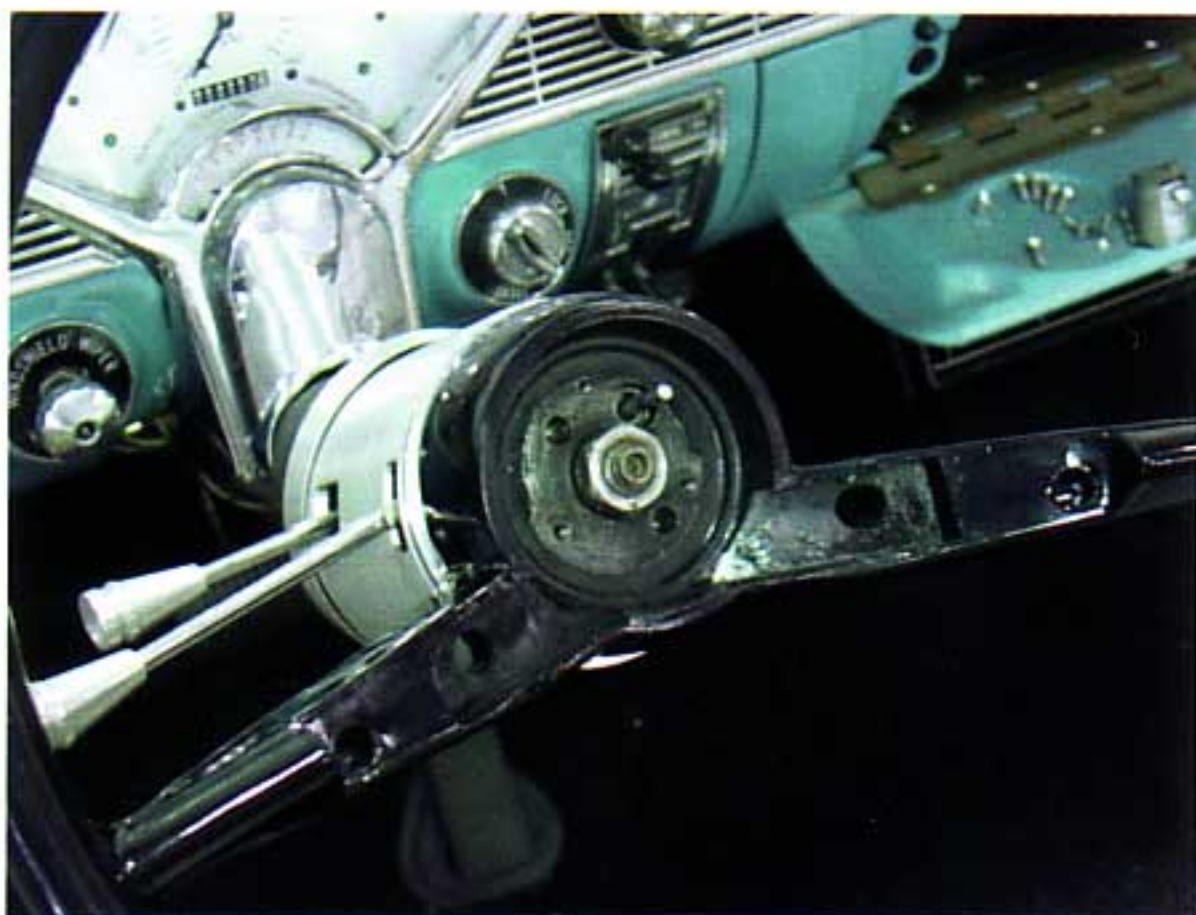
Install the steering wheel onto the steering column and torque the steering wheel retaining nut to 45 lbs. The contact pin will stick up through the hole in the steering wheel hub.
